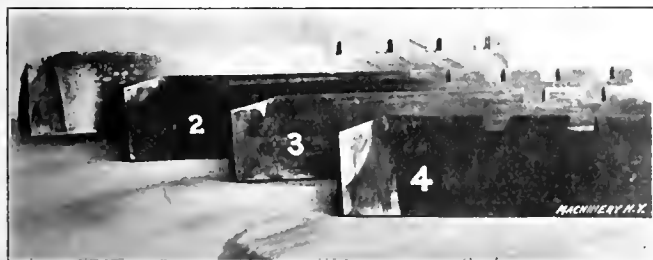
Reverse Side of Cutters shown in Fig. 1. Illustration shows Rubbing Contact of the Tool against the Shoulder of the Work. Each Tool bears Same Number in Both Engravings.
